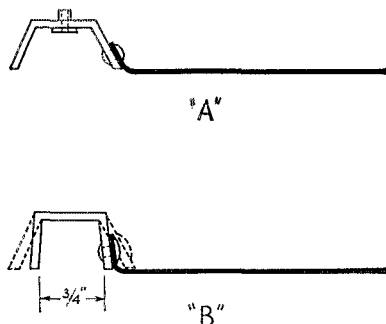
TV strap-type stand-off insulators "A", are modified by removing the threaded insert and by bending the assembly to the dimensions shown in "B".
